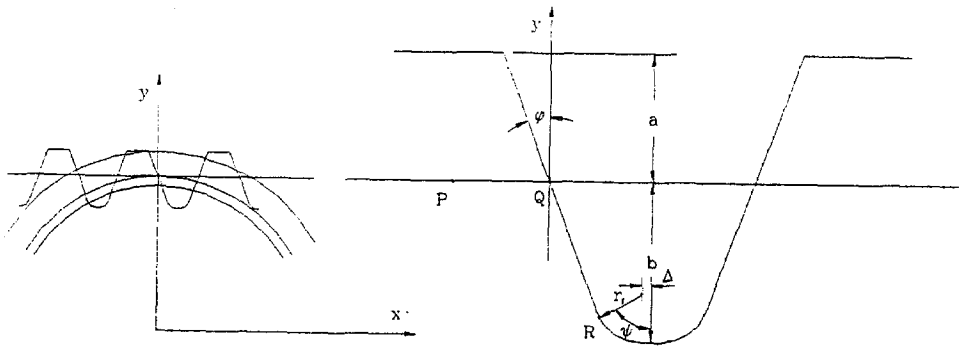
Initial position of the hob and the gear blank and enlarged view of the hob
